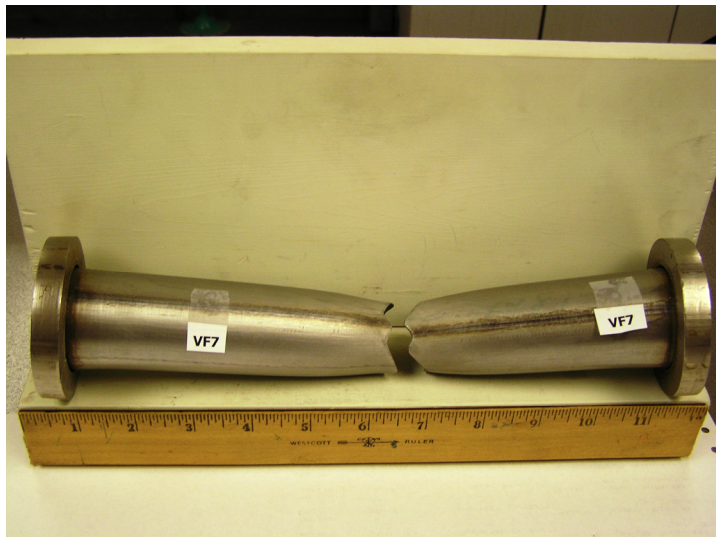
Welded and pull tested pieces of Sample VF7. Failure occurred in the wrought 409L tubing, and not in the weld or the PM disc.
